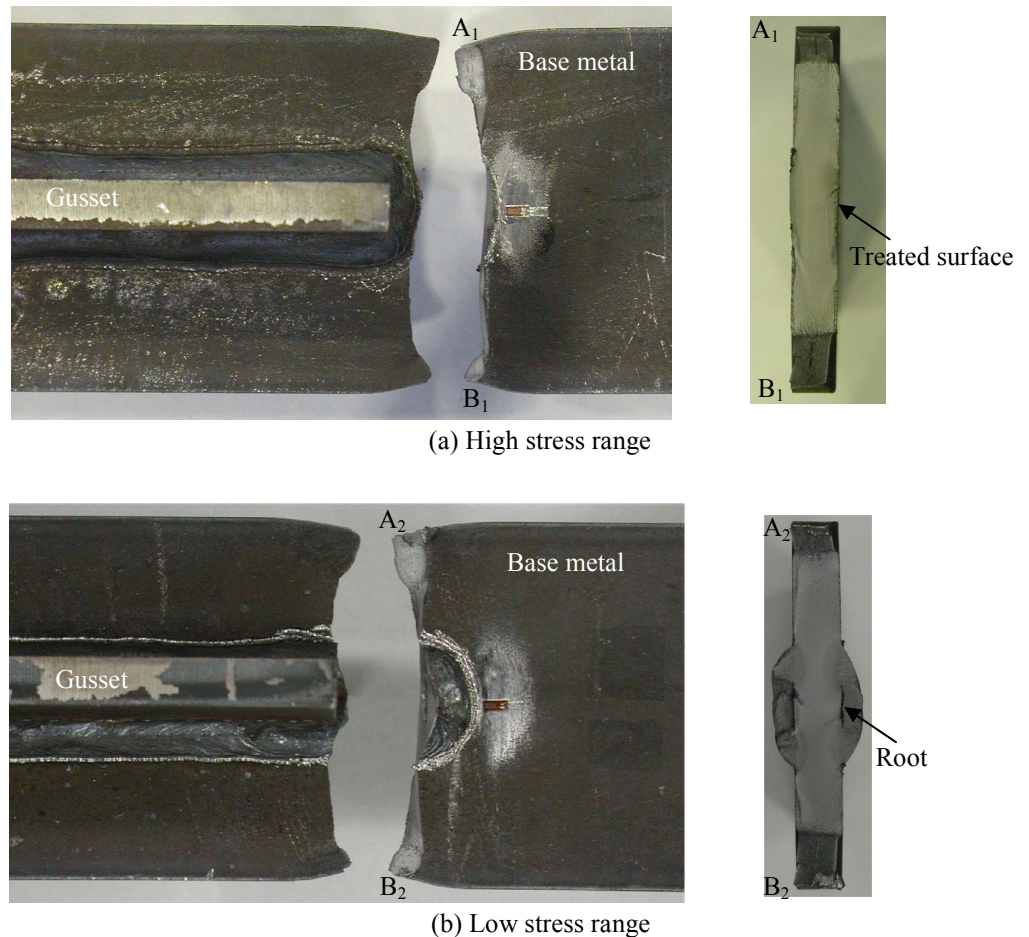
Typical examples of fatigue fractured specimens treated by UIT.
